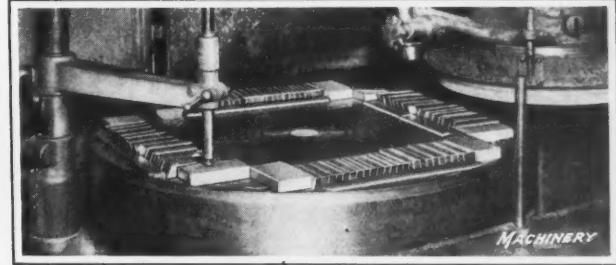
Vertical Surface Grinding Machine finishing Four Sides of Stellite Blades
